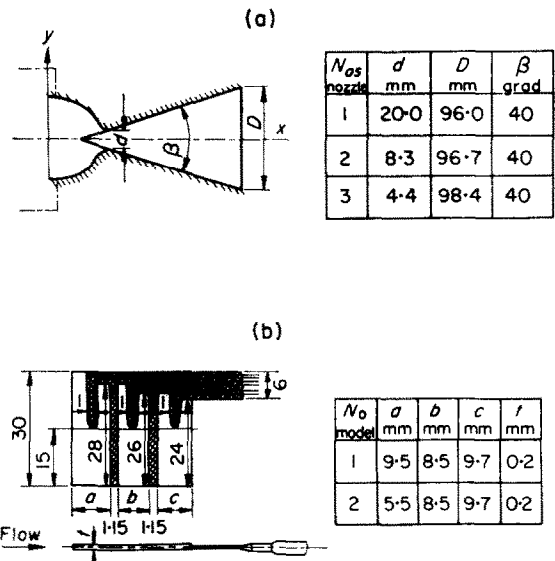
(a) Design and dimensions of conic nozzles; (b) Design and dimensions of a sectional plate.
